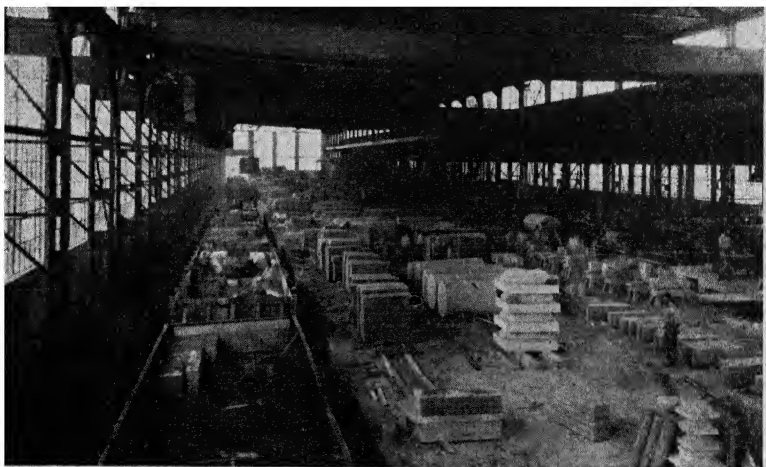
Interior of a limestone finishing mill. (Courtesy of Indiana Limestone Company.)
